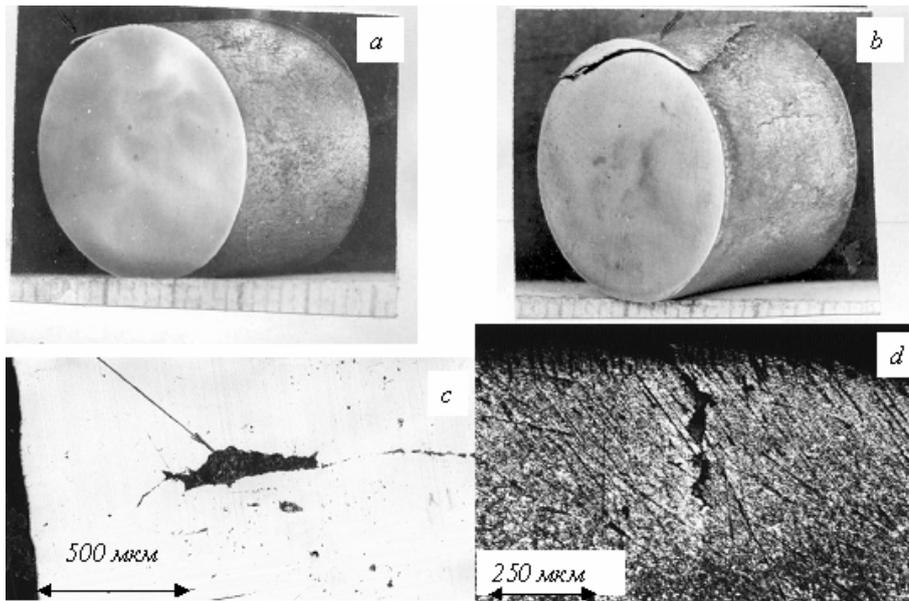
Microsection metallographic specimens of some defects in the pump rods $\varnothing 19$ mm: a - rolling defect - fold, b- steelmaking defect - scab, c - slag inclusion, d - hair seams
